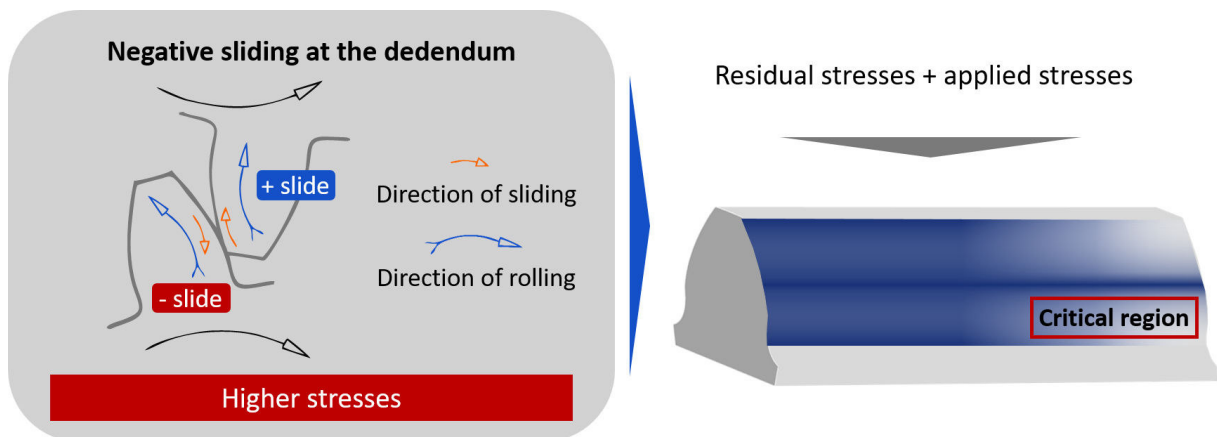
Resultant residual stress gradient at the surface of the gear tooth flank of the powder metallurgy manufacturing chain
